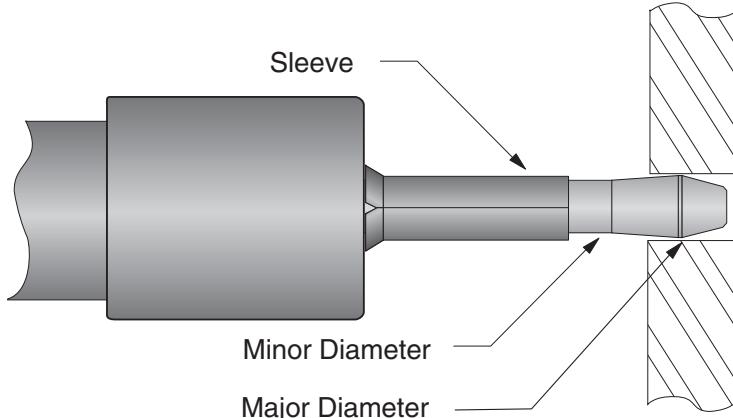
Positioning Sleeve on Mandrel (dimensions exaggerated for clarity)
